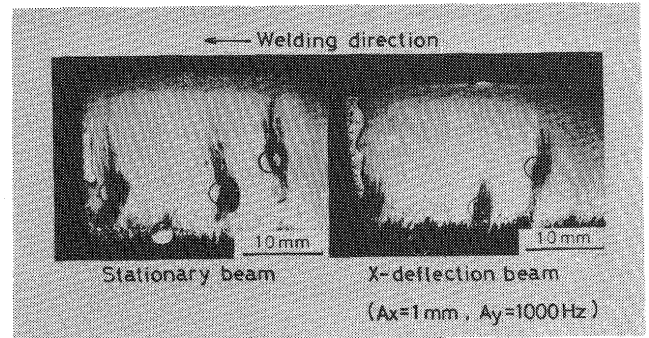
Solidification pattern and crater pattern in longitudinal section in SUS304 welds. (Used covered electrode core wire for insert metal)
